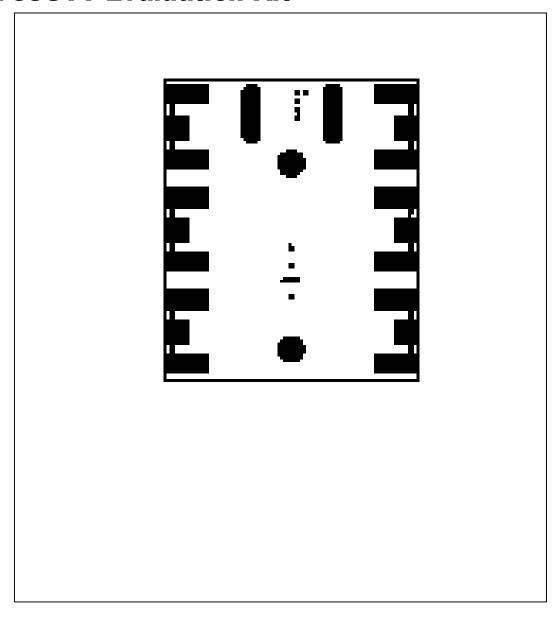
MAX3785UTTA EV Kit PC Board Layout – Bottom Side (2X), layer 4.
